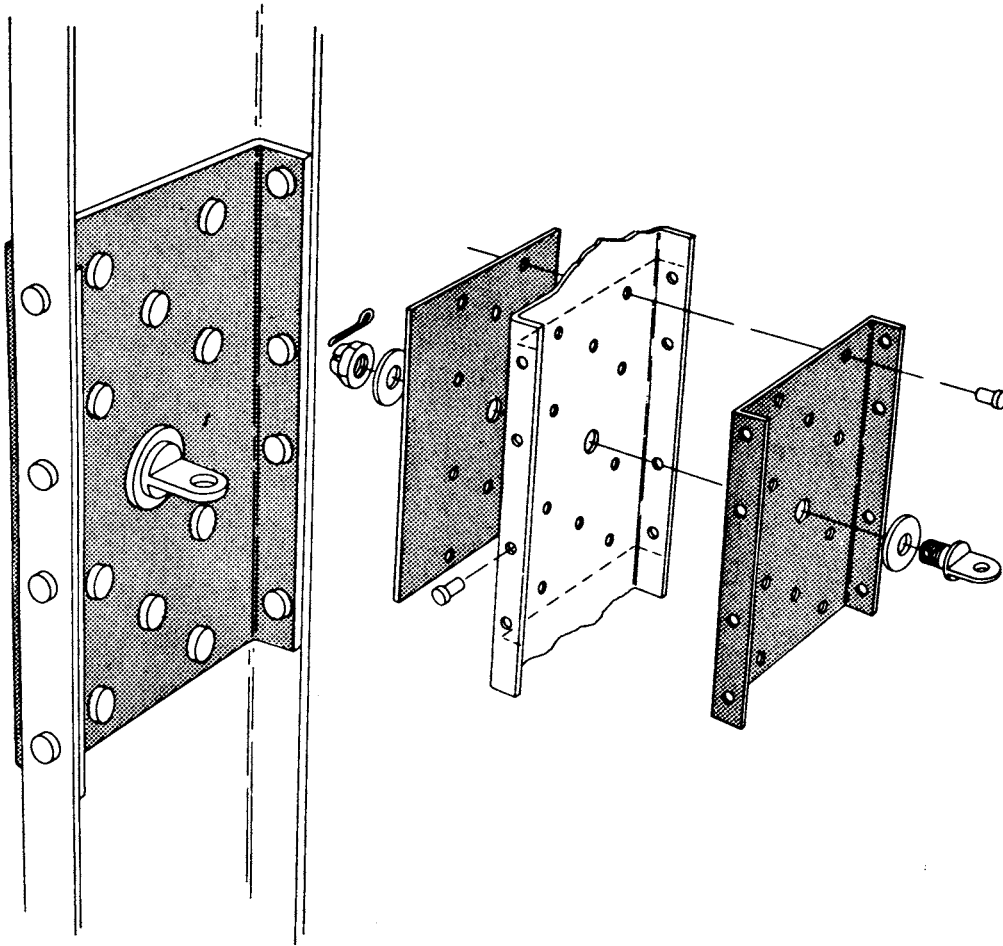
Typical bulkhead reinforcement installation.
